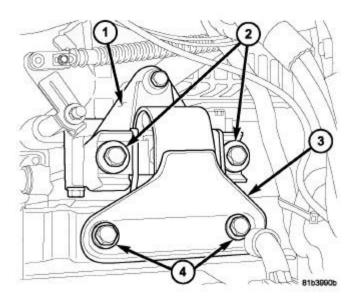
Identifying Left Engine Mount Courtesy of CHRYSLER LLC
